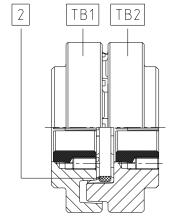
Type with taper clamping sleeve hub design TB1 and TB2
